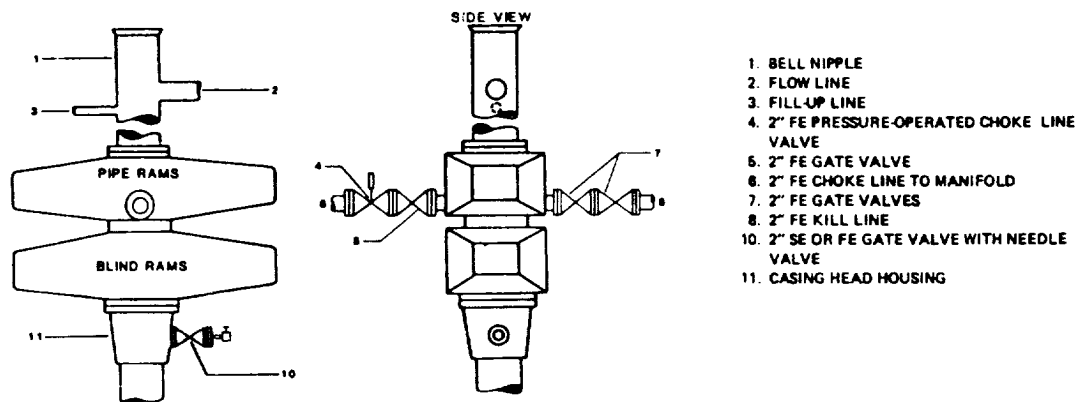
Standard Hydraulic Blowout Preventer Assembly
